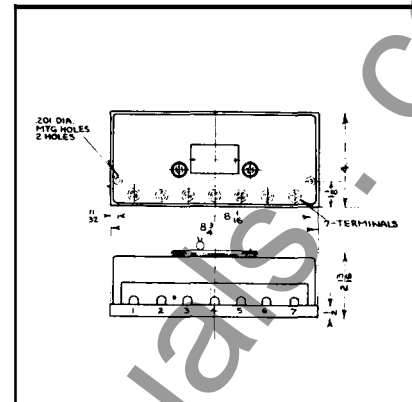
Outline Dimensions and Drilling Plan for Phase Shifting Transformer used with 3-phase, 3-wire Var-meter.
